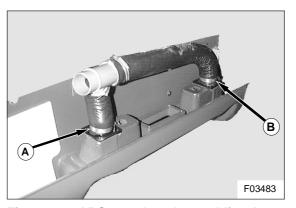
ABS rear bench moulding hose clamps and mounting flanges (rear view)
